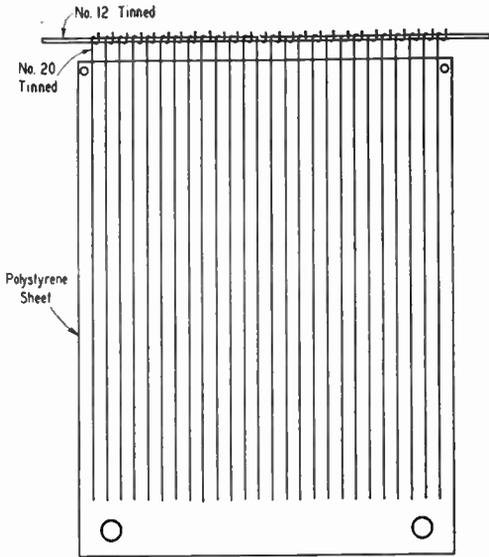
Constructional details of the Faraday shield, before soldering the ends of the No. 20 wires to the No. 12 wire bus.
